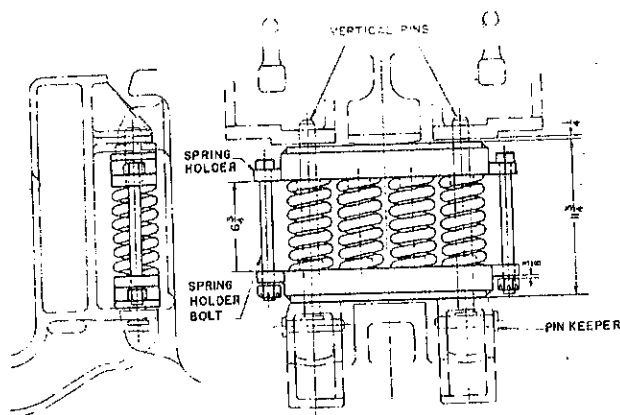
TRACTION MOTOR NOSE SUPPORT
